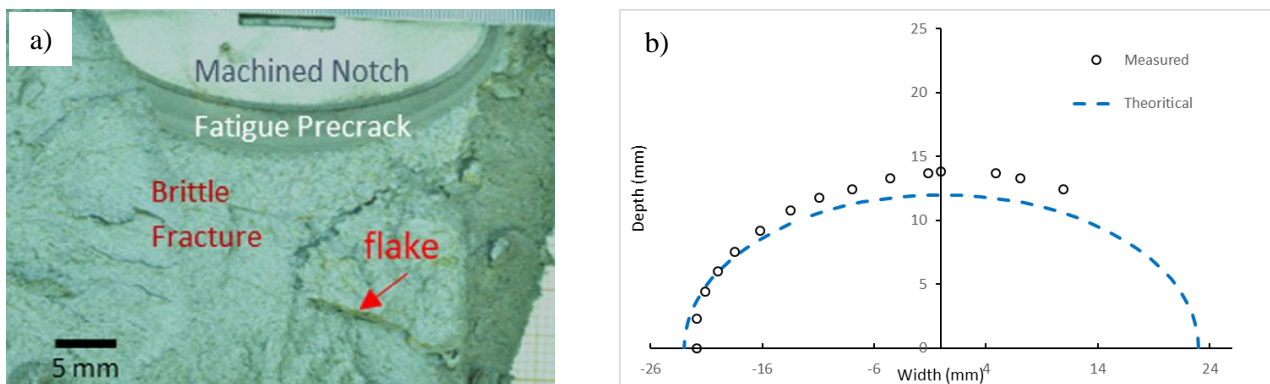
a) Fracture surface of the cruciform specimen, b) Fatigue precrack front.
